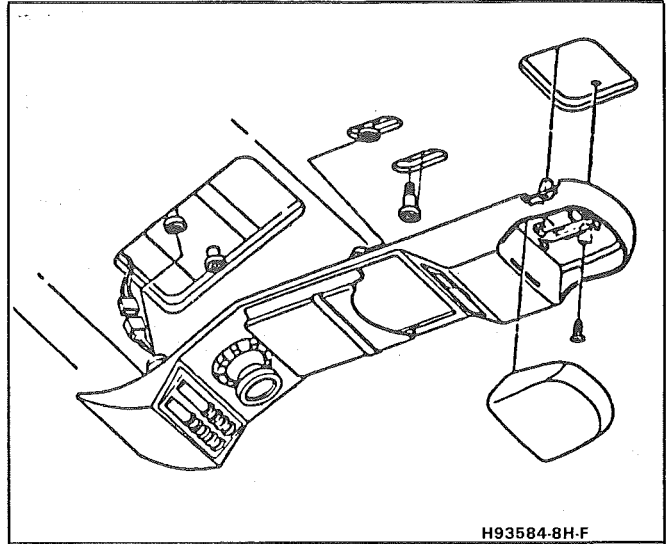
Windshield Header Courtesy Reading and Console Lamp
